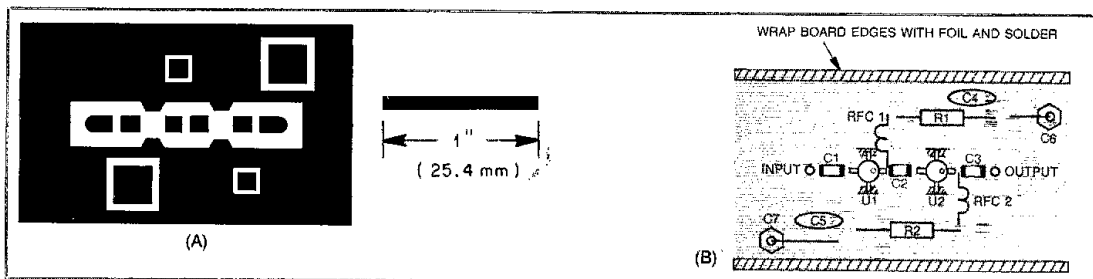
Etching pattern and PC-board layout information for the microstripline MMIC amplifier of Fig 8. All components mount on the circuit-trace side of the board. A PC board can be etched from the pattern shown at A, or a sharp knife and hot soldering iron can be used to clear away unwanted copper. Black areas represent unetched copper.
